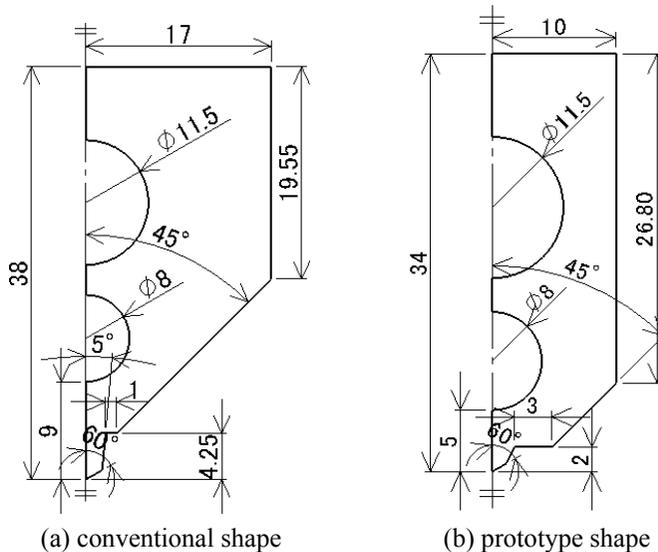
Shape and size of heat cutter (1/2 model) (units: mm)
